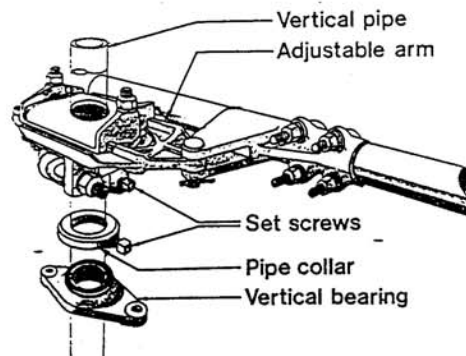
Exploded view of the adjustable arm assembly. Important: The pipe collar must support the entire weight of the vertical pipe. Do not allow the housing of the manual or motor operator to bear any of the weight of the vertical pipe.
